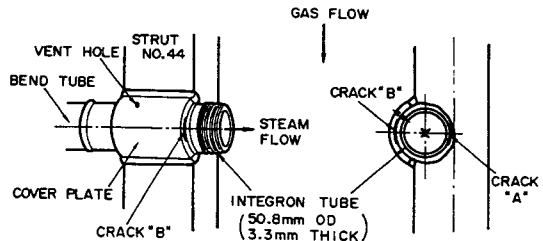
Fatigue cracks at fillet weld toes.
